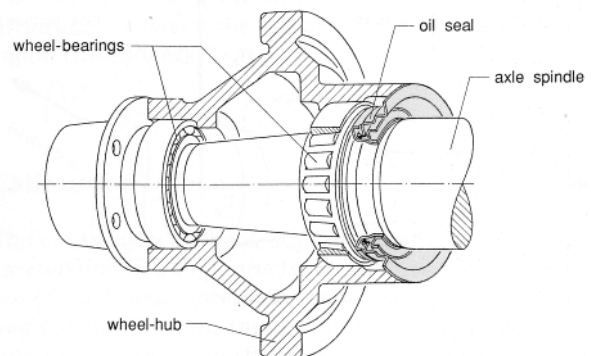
Internal view of a wheel-hub unit with oil bath seal.
